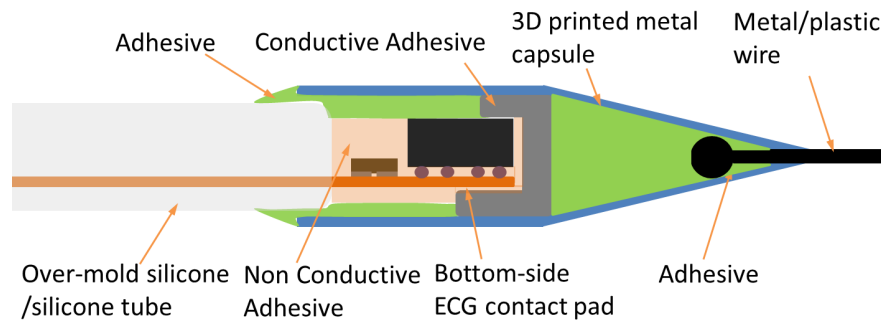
Metal capsule assembly of the implantable accelerometer device version 2-1.
